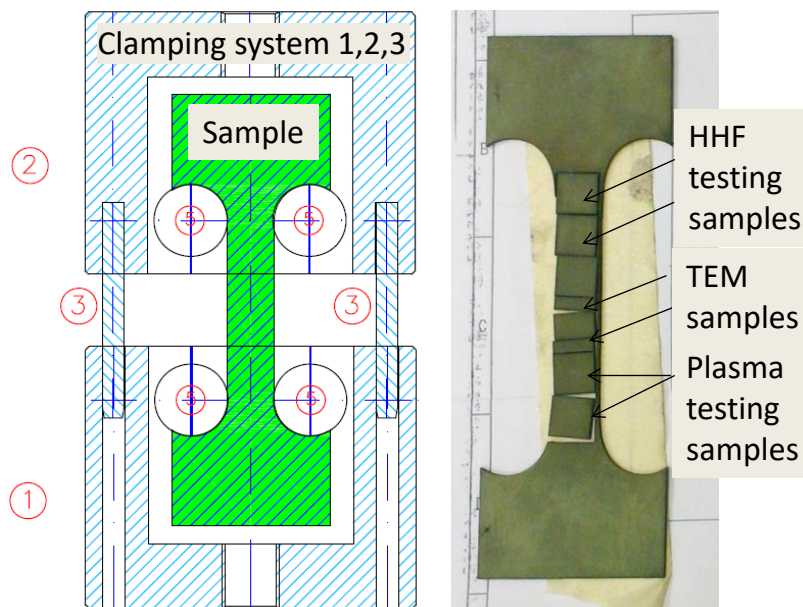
Flat macro sample for tensile testing. The left-hand side shows the sample geometry and clamping system, while the right-hand side shows a picture of the loaded sample after EDM cutting to produce samples for TEM examination, high heat flux (HHF) testing and plasma exposure testing.
